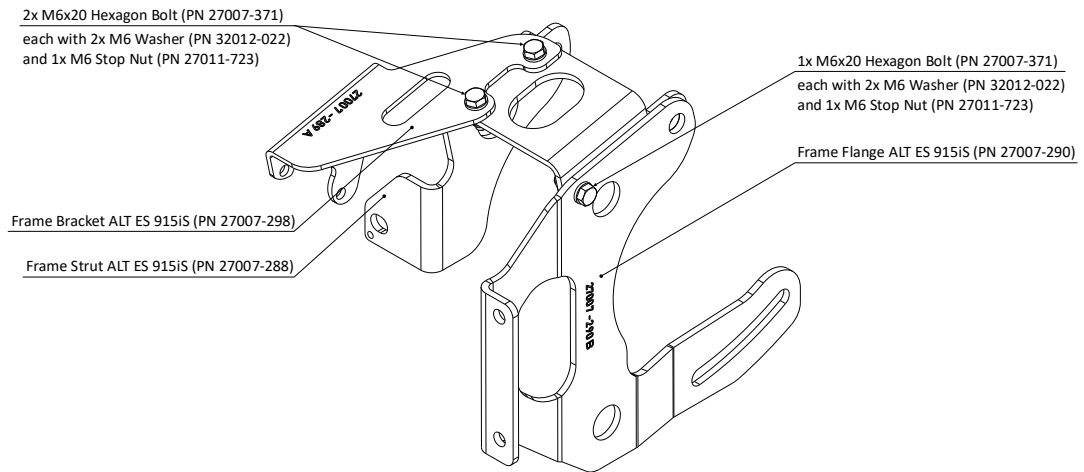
Isometric View Ext. Alternator Kit 70A Rotax 916iS Frames
